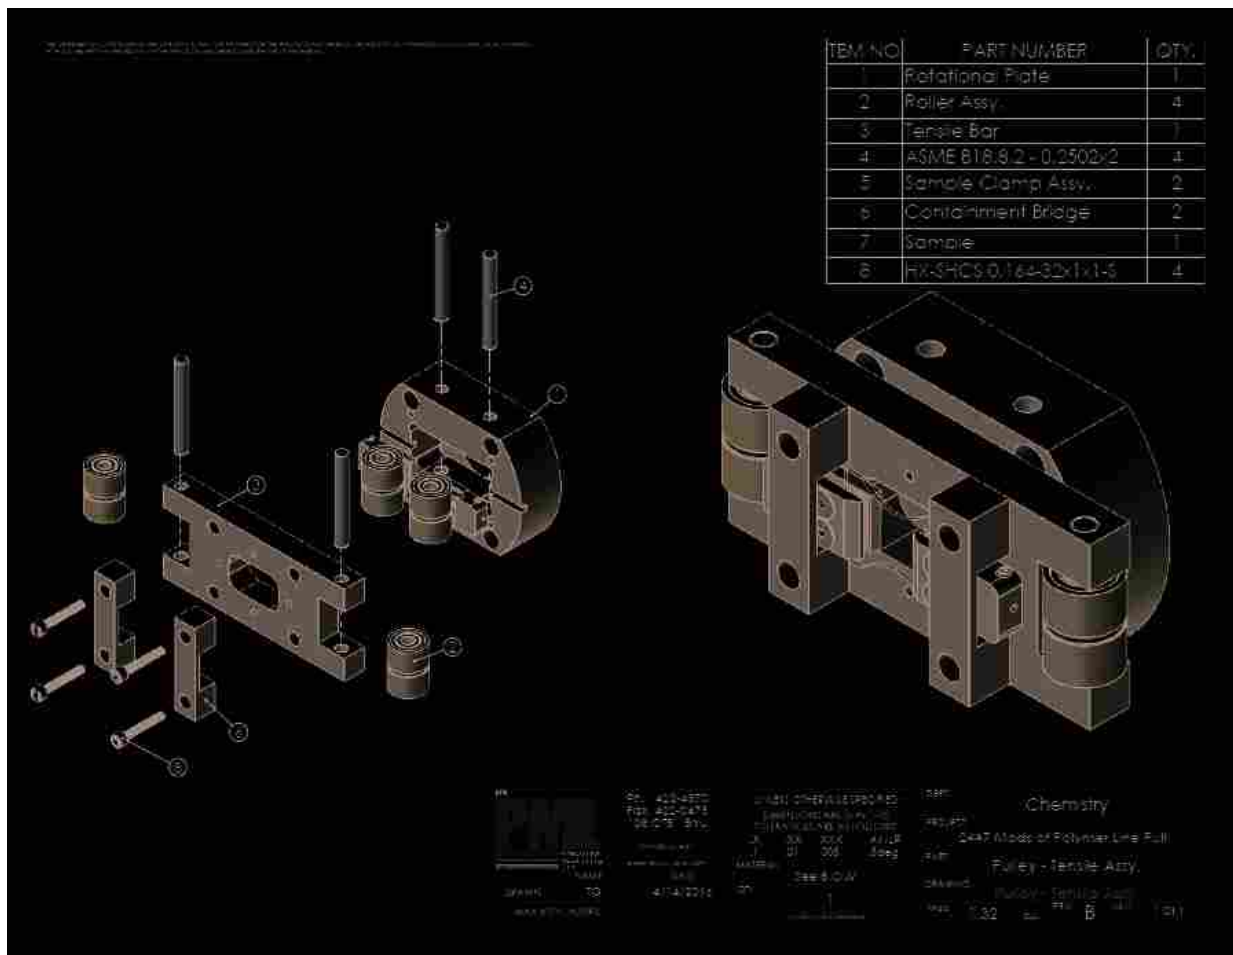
Assembly drawing of the live pull adapter for the current sample mount.
